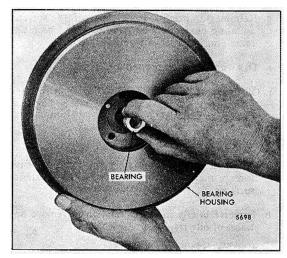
Removing Turbine Shaft Bearing from Bearing Housing
